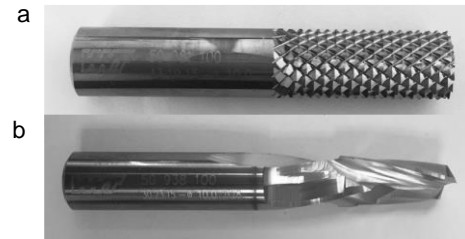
(a) Multi-tooth cutting tool; (b) up-down cutting tool
